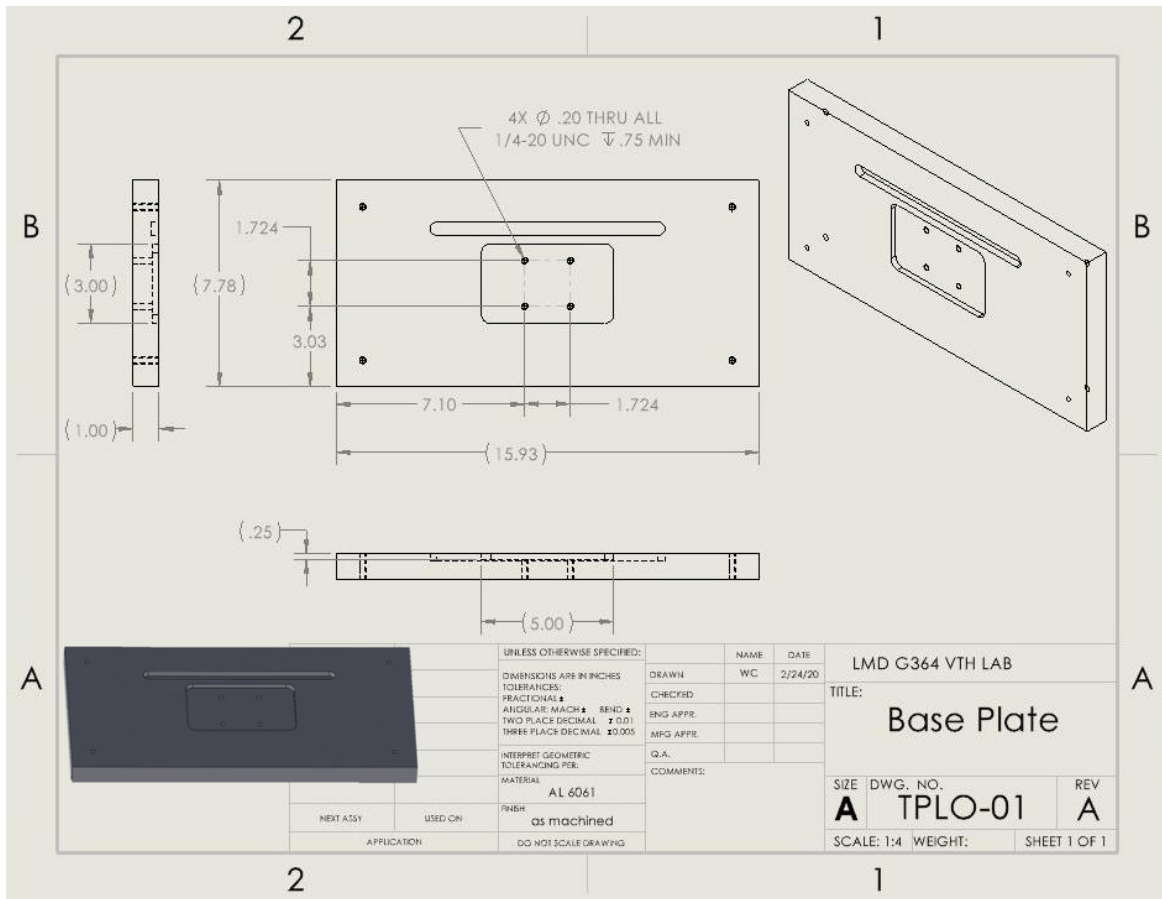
CAD drawing of the base plate of the custom-built loading press
